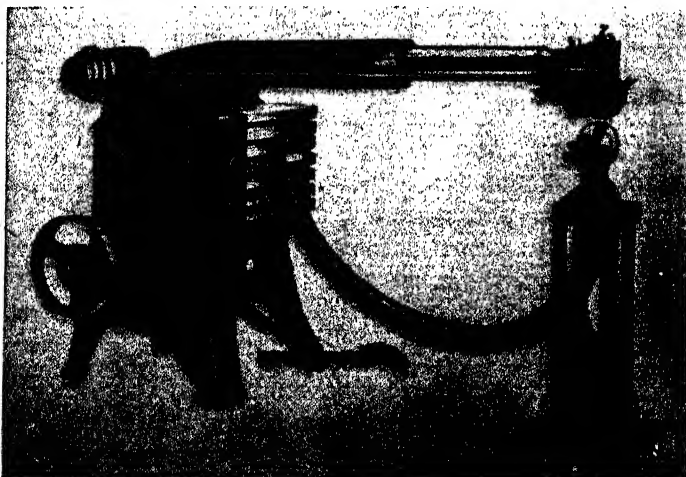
Seam welding machine for the welding of heavy members
